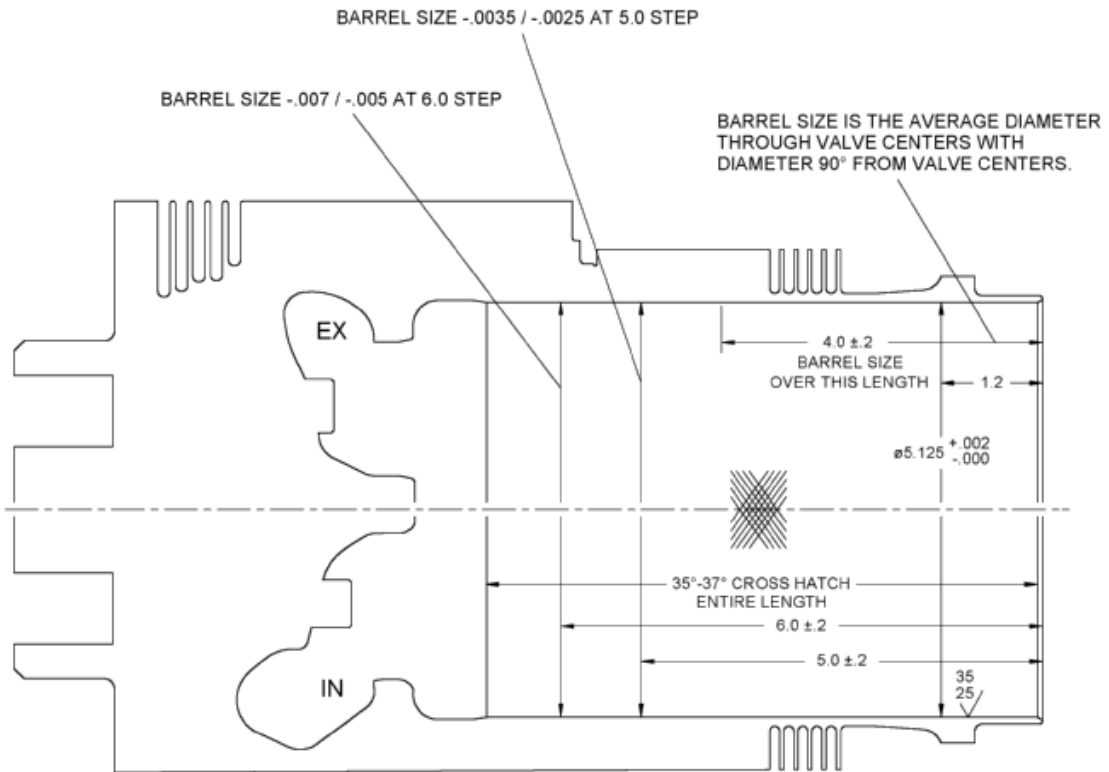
• Cylinder Interior Resurface Crosshatch
